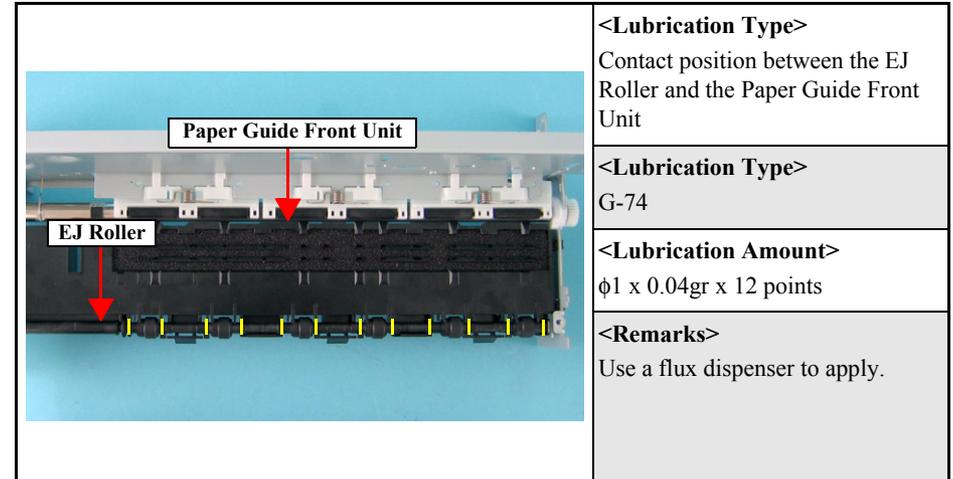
Lubrication on Paper Guide Front Unit (2)
